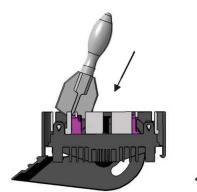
38-way connector, put on operating tool Abb. 18: Kabelbaumstecker 38 polig; ansetzten des Betätigungswerkzeuges
